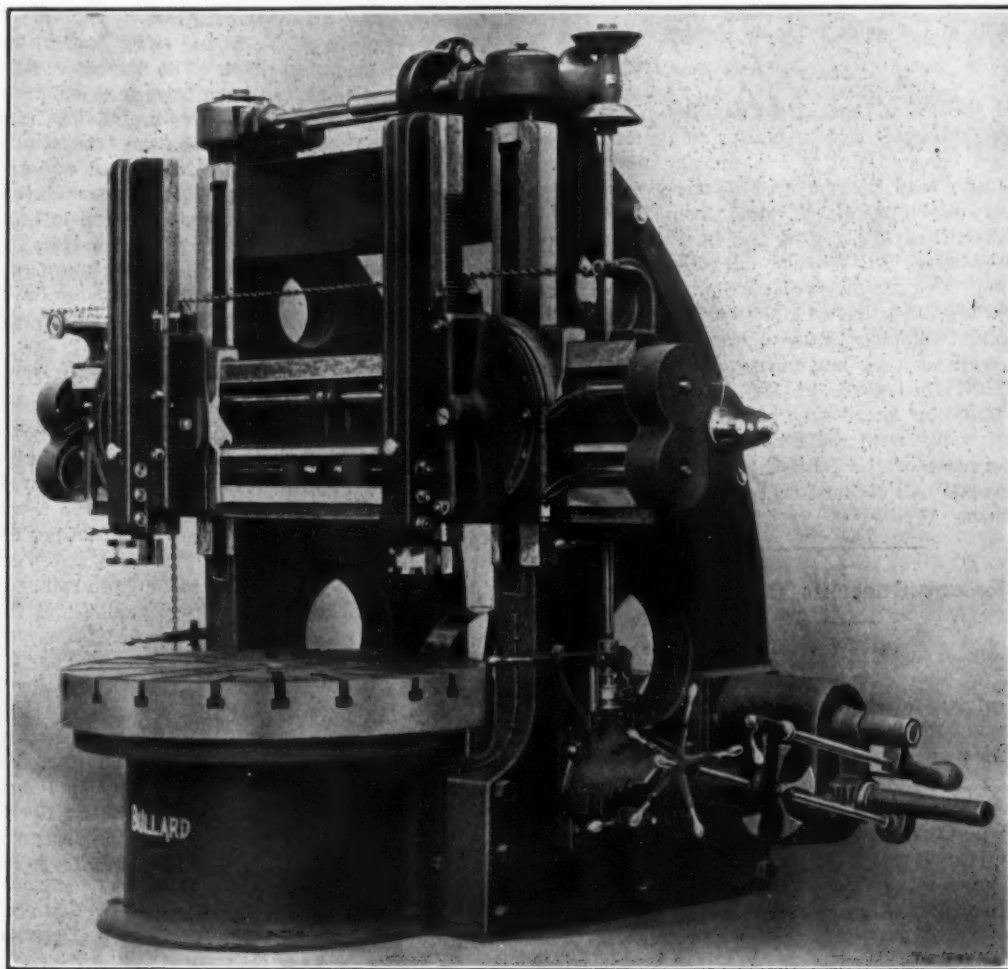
The New 54-Inch Boring and Turning Mill Built by the Bullard Machine Tool Company, Bridgeport, Conn.
